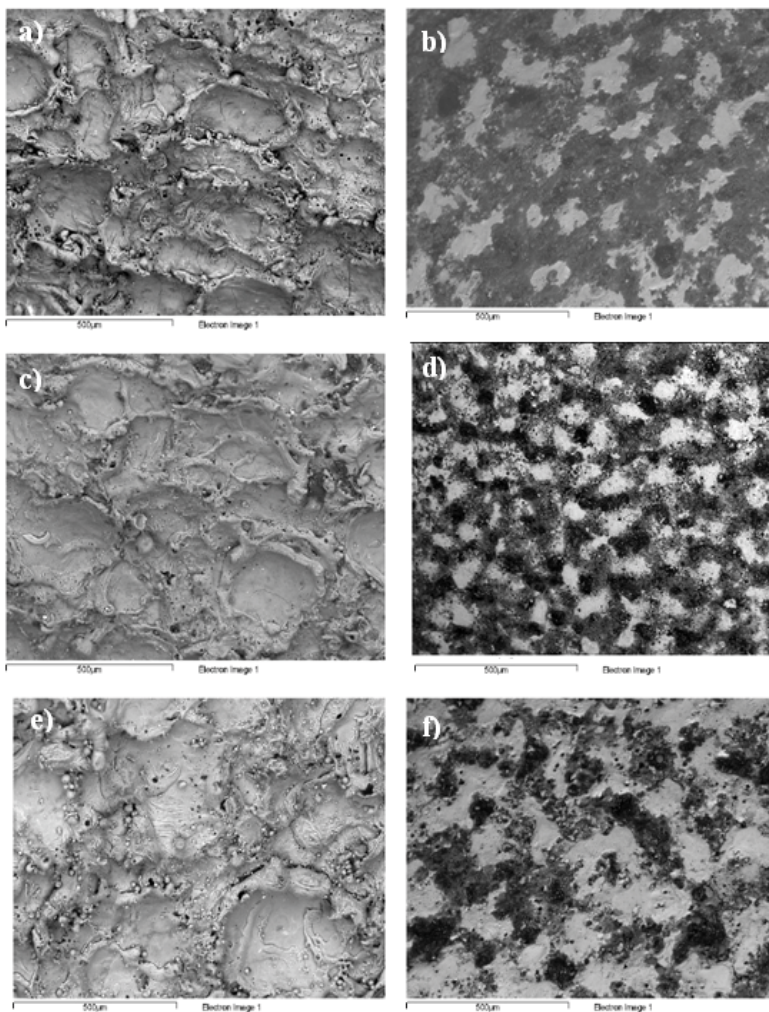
Surfaces of the workpieces: a)Al 7075, c) Al7050, e)Al 2219 after roughing; and of the electrodes: b) Al 7075, d) Al7050, f)Al 2219; after roughing (A zone)
